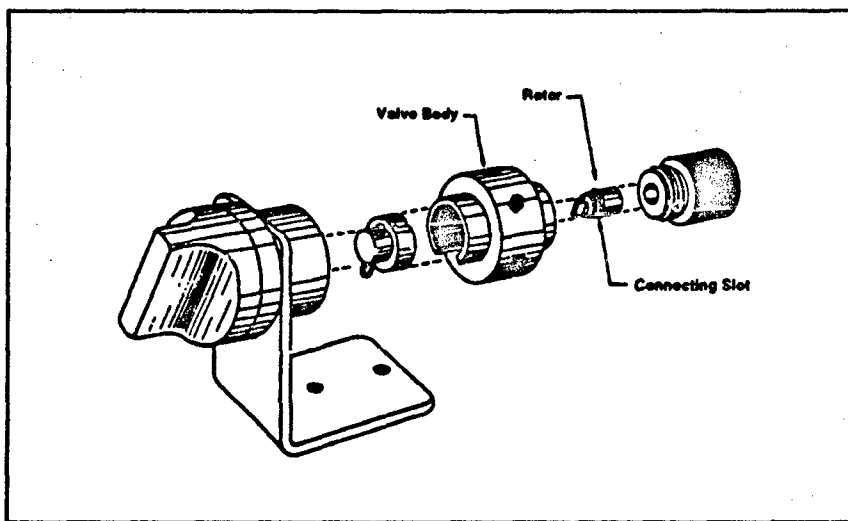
Exploded View of the Sample Injection Valve Used in this Investigation (119).
